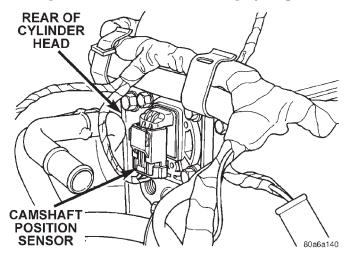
Camshaft Position Sensor—2.0L SOHC OPERATION
